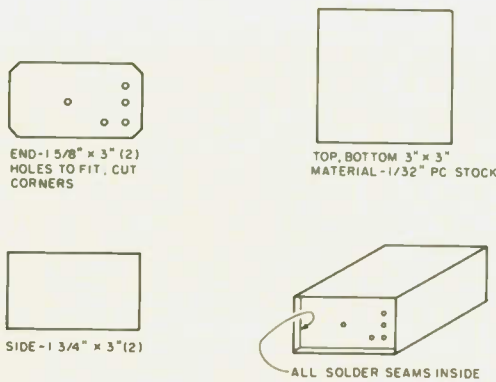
Shield box dimensions. Actual sizes are determined by the tuner used.
